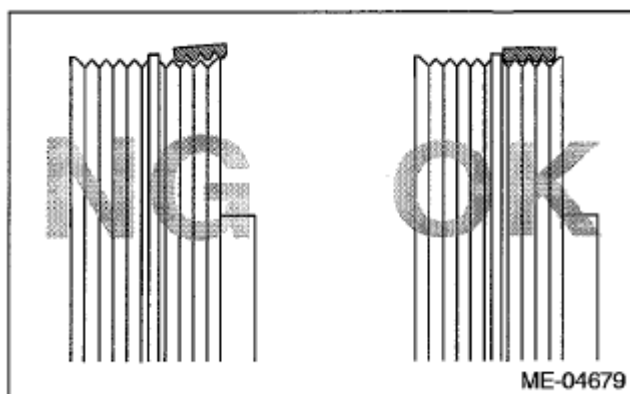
Identifying Correct And Incorrect Installation Position Of Rear Side Belt (Crank Pulley)
